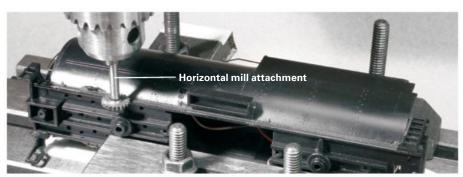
A close shave. Peter removed the molded piping and rerail frog with a horizontal mill attachment in a drill press. The drill press should be run at low speed to avoid melting the plastic.
